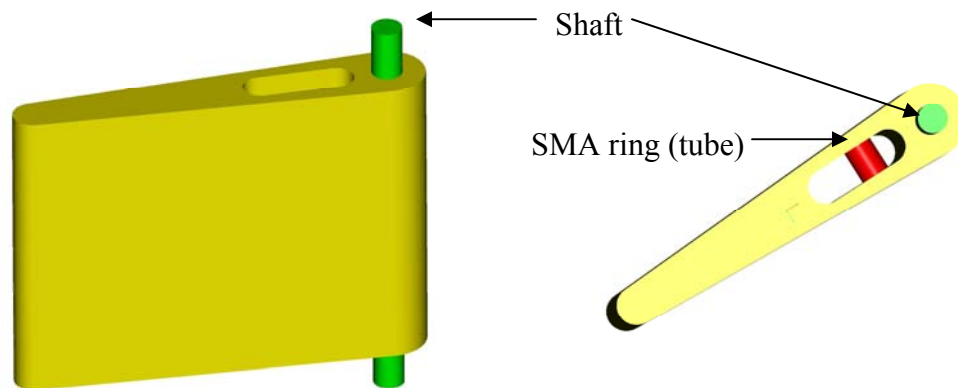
First Leading Edge Locking and Releasing Mechanism Design
